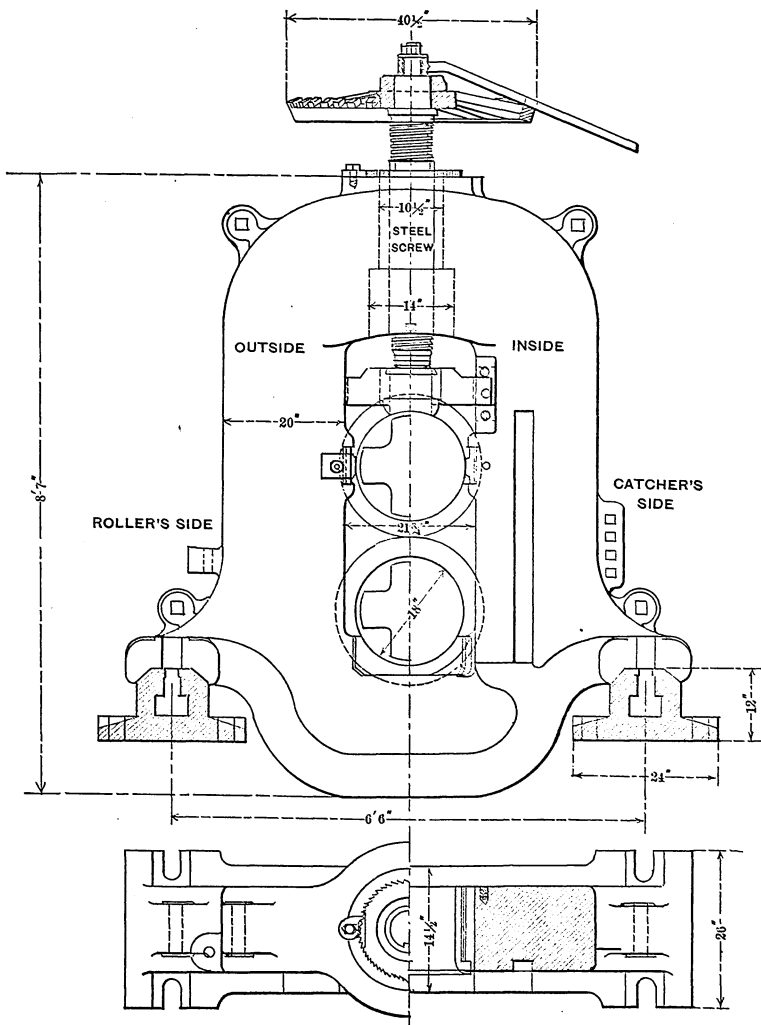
Sheet Mill Housing, Garrison Design.—Weight, 21,000 Pounds.
